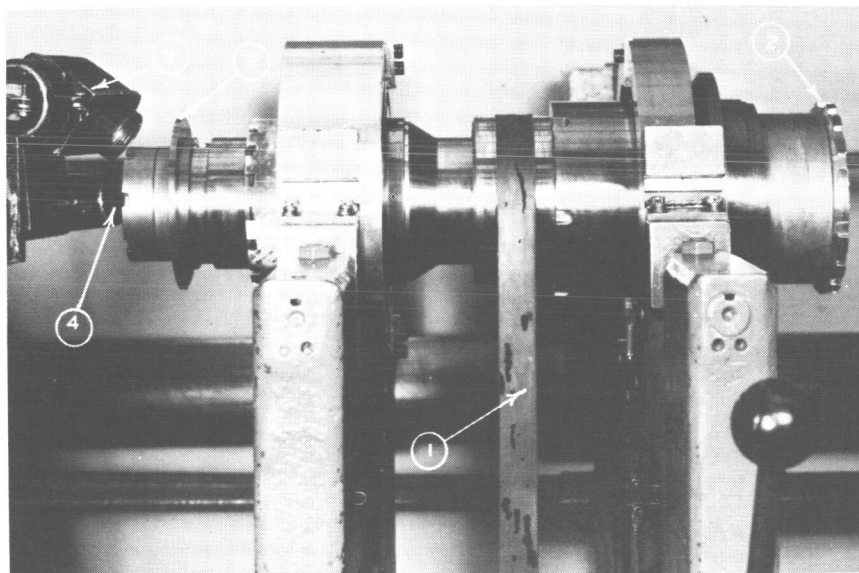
Mainshaft Seal Rig 29,360 - Shaft Assembly in Gisholt Dynetric Balance Machine Supports During Balance Operation. Note: 1. Belt Drive. 2. Correction Planes. 3. Photo-Cell Compensator. 4. Speed Pickup
